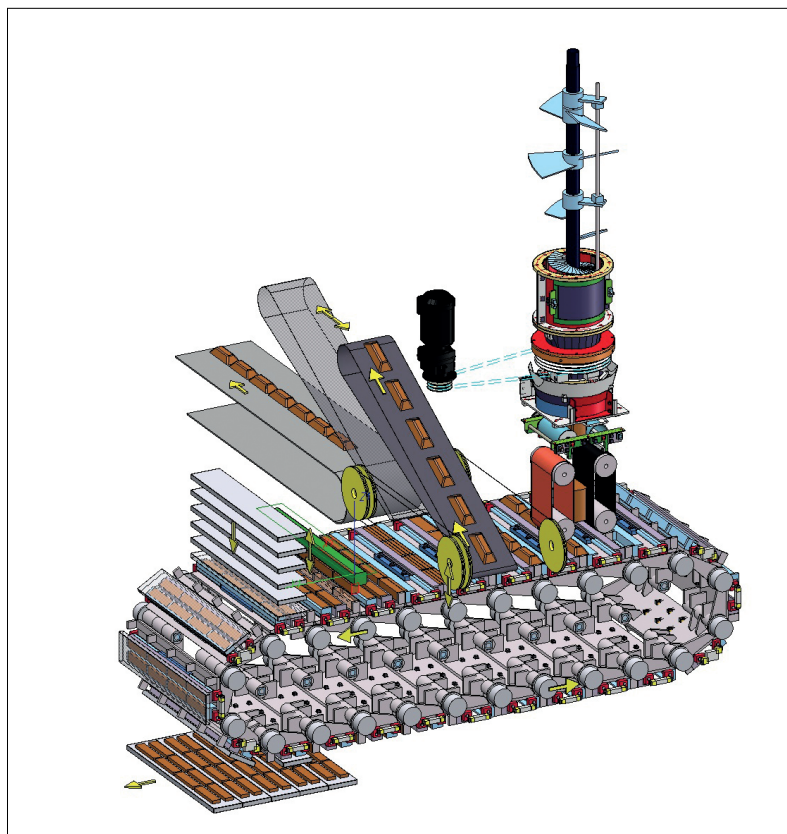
De Boer mould chain with Hubert clay extruder for hand-moulded brick slips
